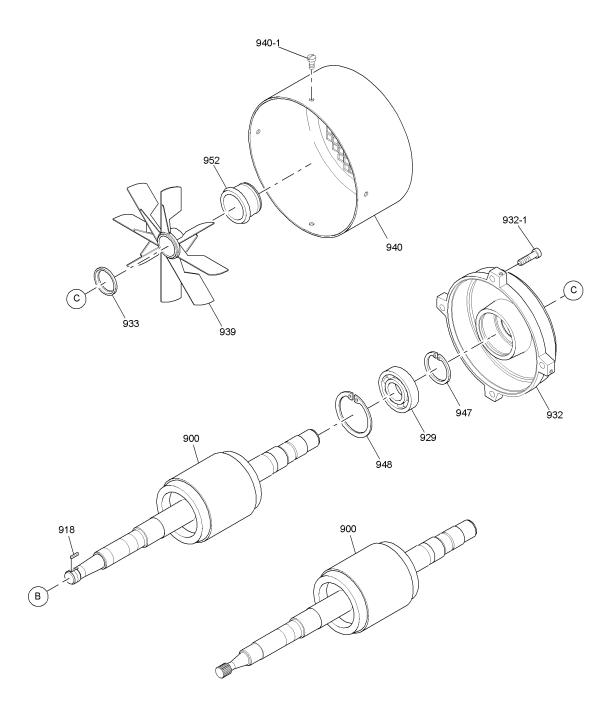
General Motor Exploded View and Generic Parts List (Sheet 2 of 2)
